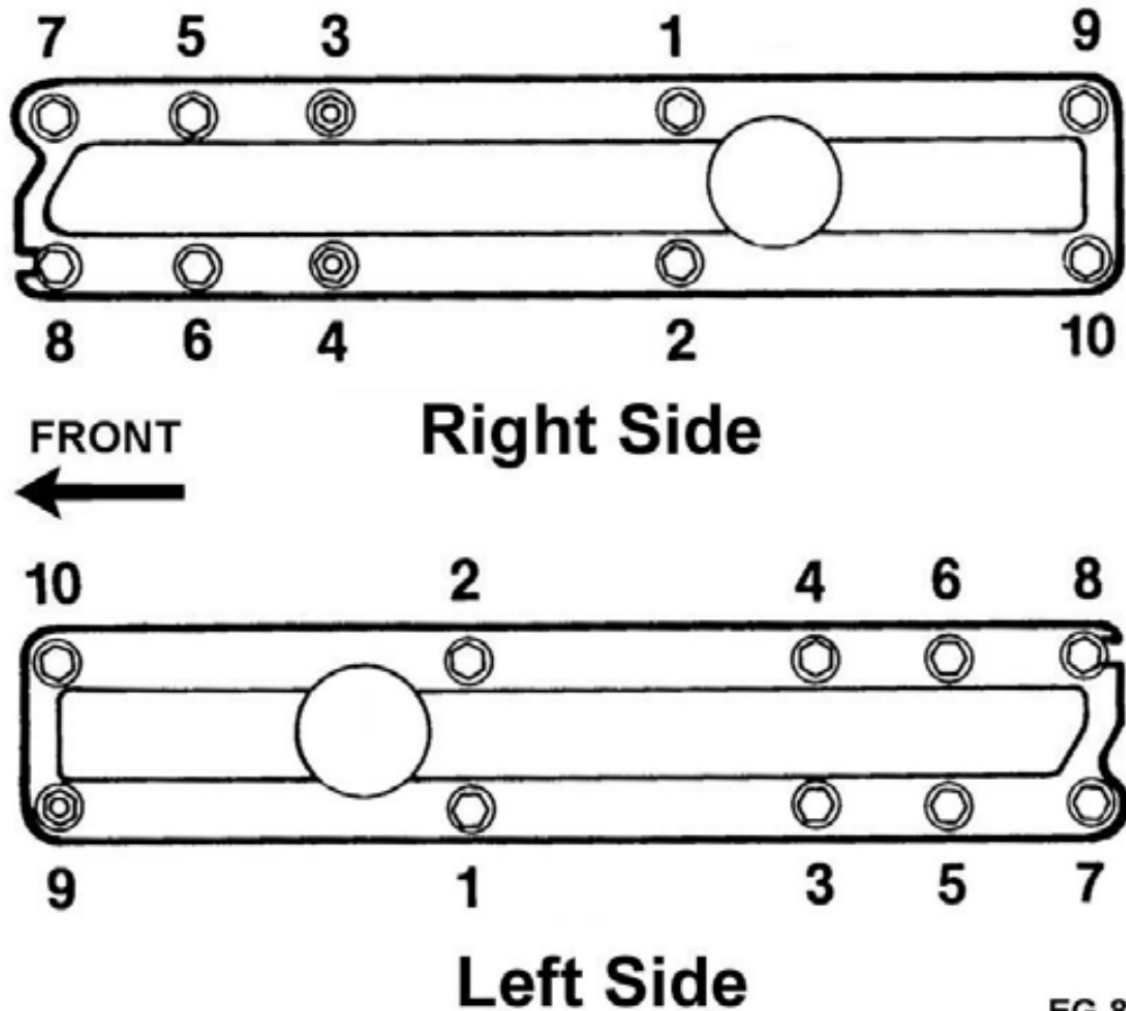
Exhaust Manifold Mounting Bolt Torque Sequence
